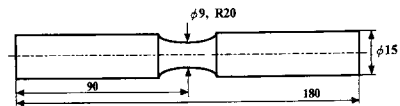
Configuration and dimensions of rotary bending fatigue specimen (mm).
